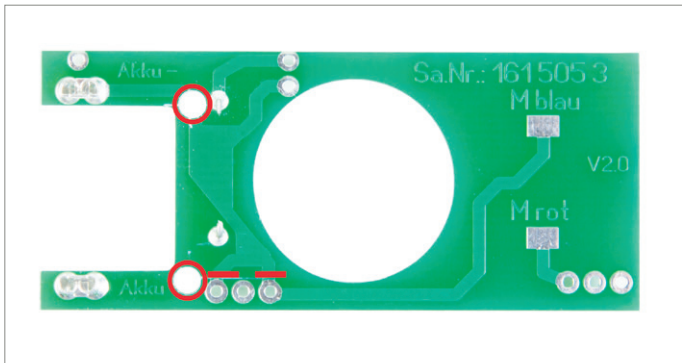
Cutting strip conductors on the universal PCB, plugged batteries
